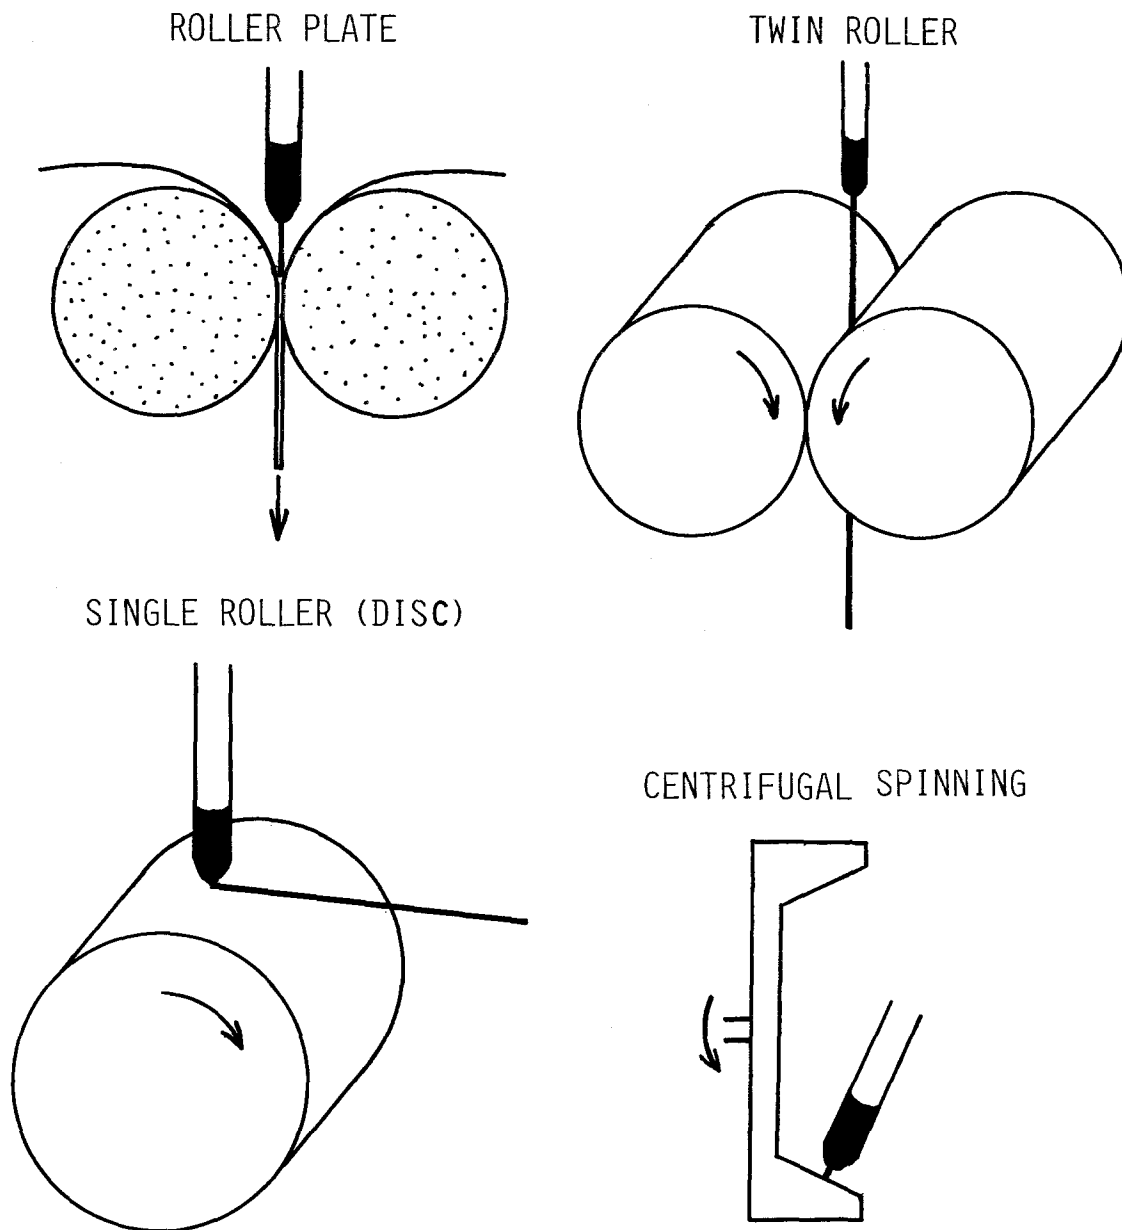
Schematic drawings of the four sets of quenching apparatus tested.
